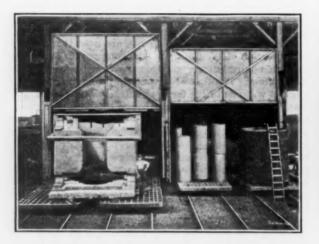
Core Oven, Showing Mold of 84 & 66 Corliss Cylinder.
